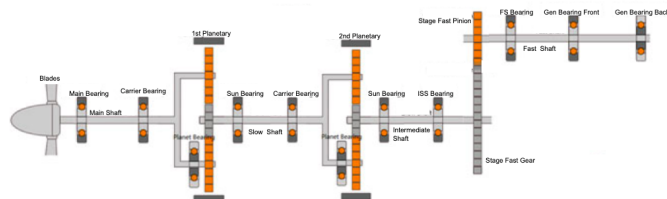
Illustration of the gearbox used in Vestas WT, consisting of two planetary gears, one parallel gear and several bearings. The illustration is a modification of a gearbox shown in Barszcz (2019).
